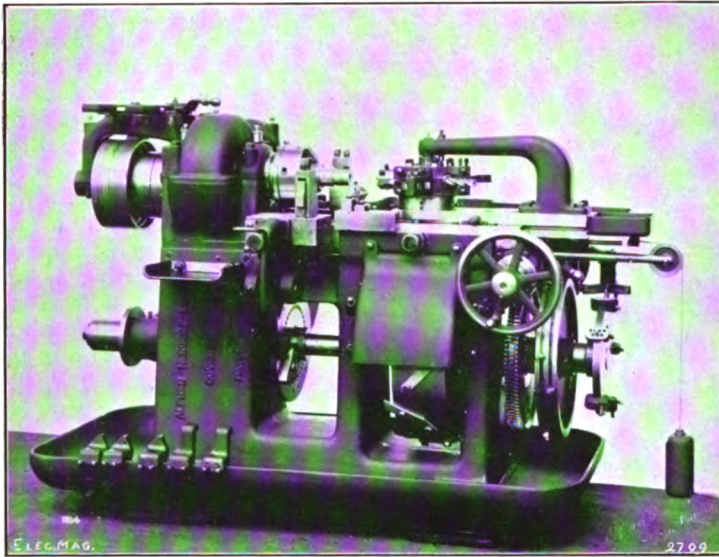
AUTOMATIC TURNING MACHINE. ALFRED HERBERT, LTD.
